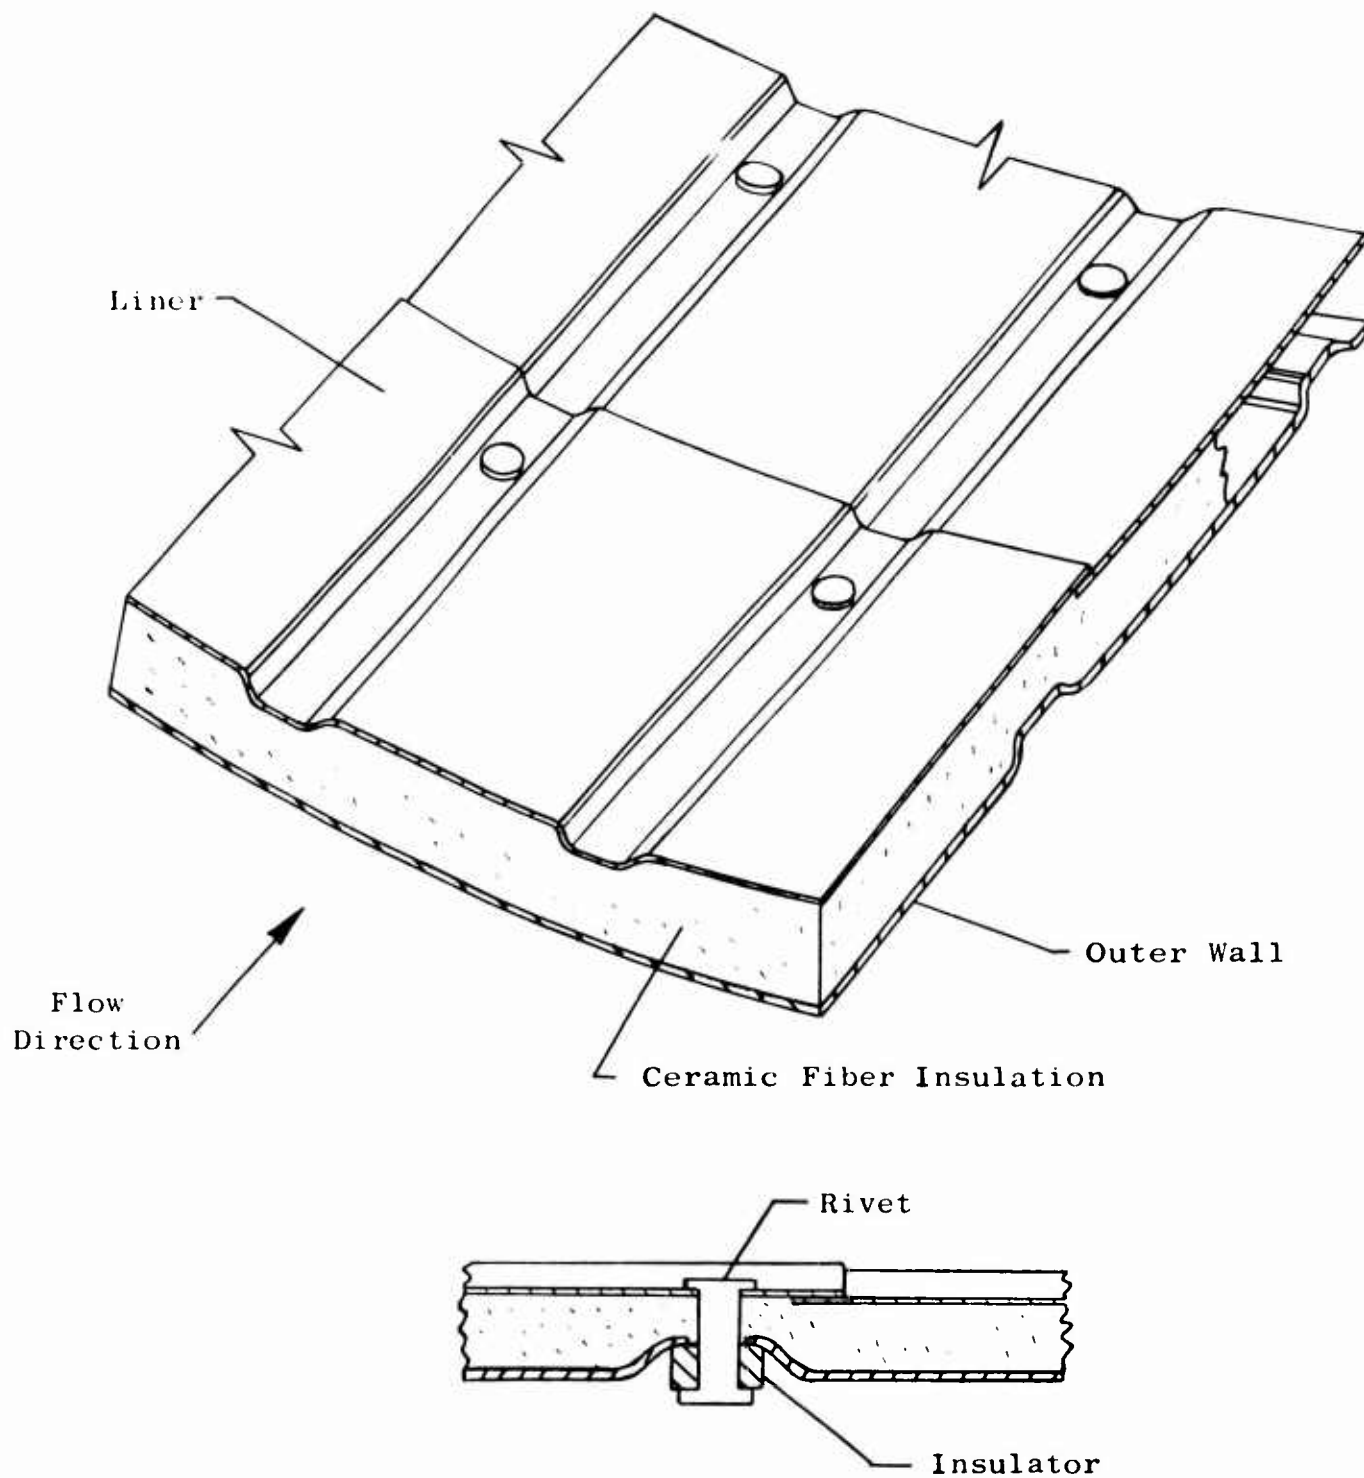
Double-Wall Duct Construction Section Showing Attachment Detail.
